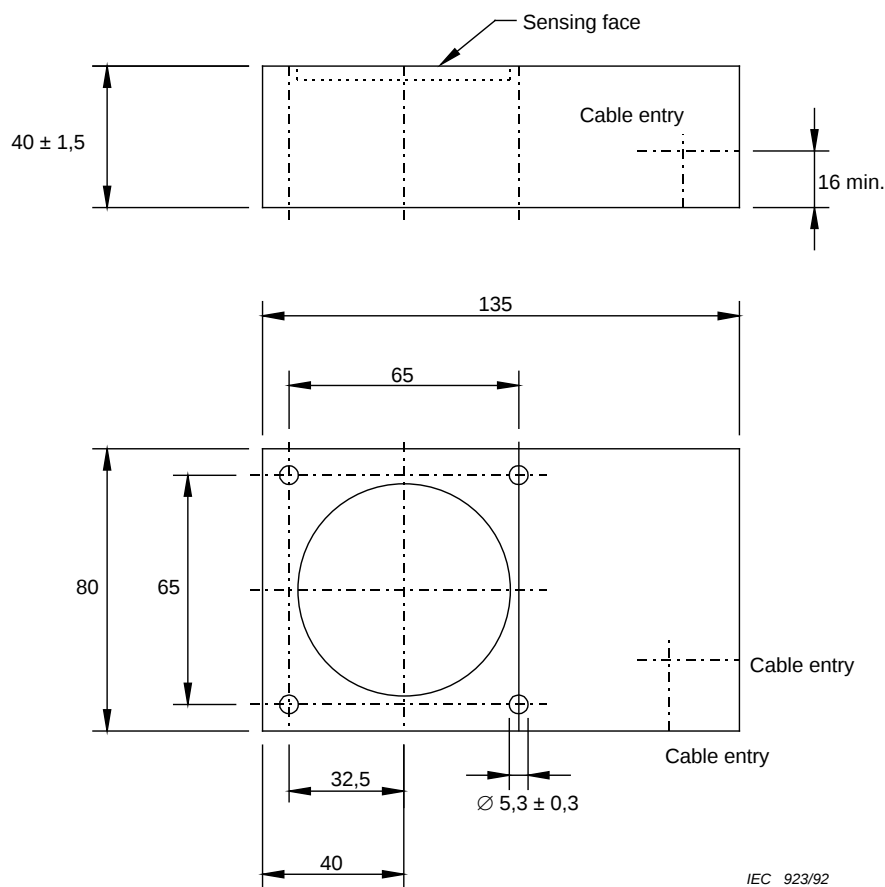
(UD) – Dimensions of type U3D80 in millimetres
